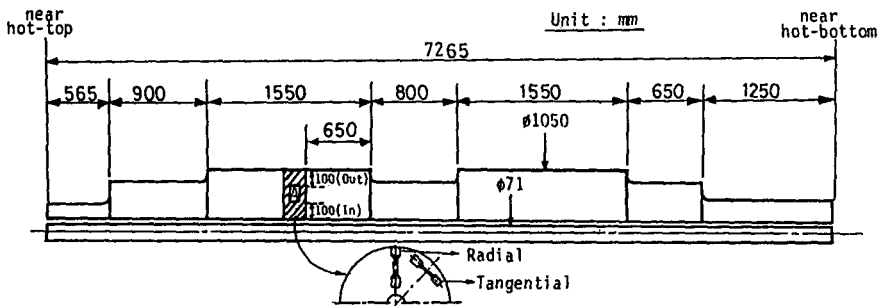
External shape and mechanical property test part (A) of 12%Cr trial rotor
